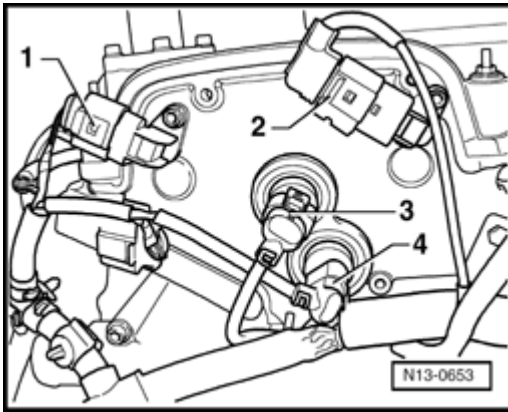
Identifying CMP Sensor G40, CMP Sensor 2 G163 And Connectors
